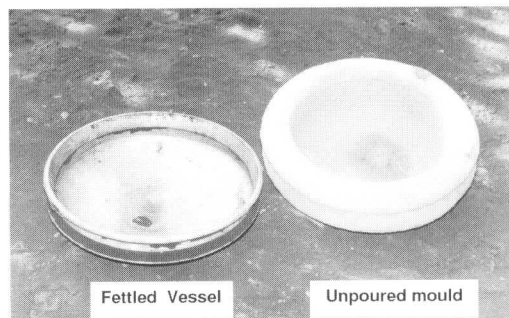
Vessel (urli) removed from the mould and a completed unpoured mould.
